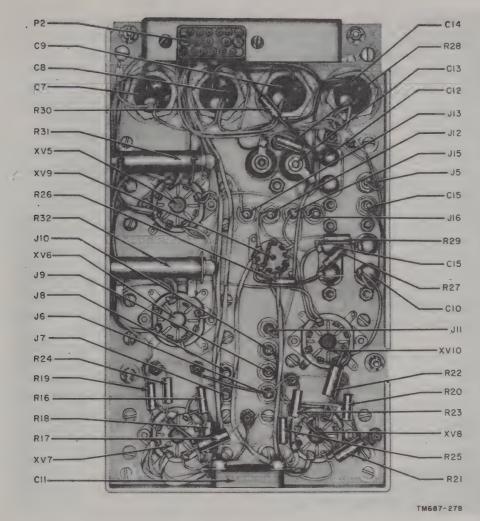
Power Supply PP-685/TRC, low-voltage rectifier assembly, bottom view.
